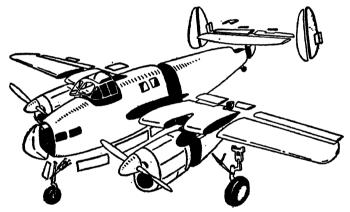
Assembly units of a twin-engine, twin-tail, midwing monoplane with tricycle landing gear
